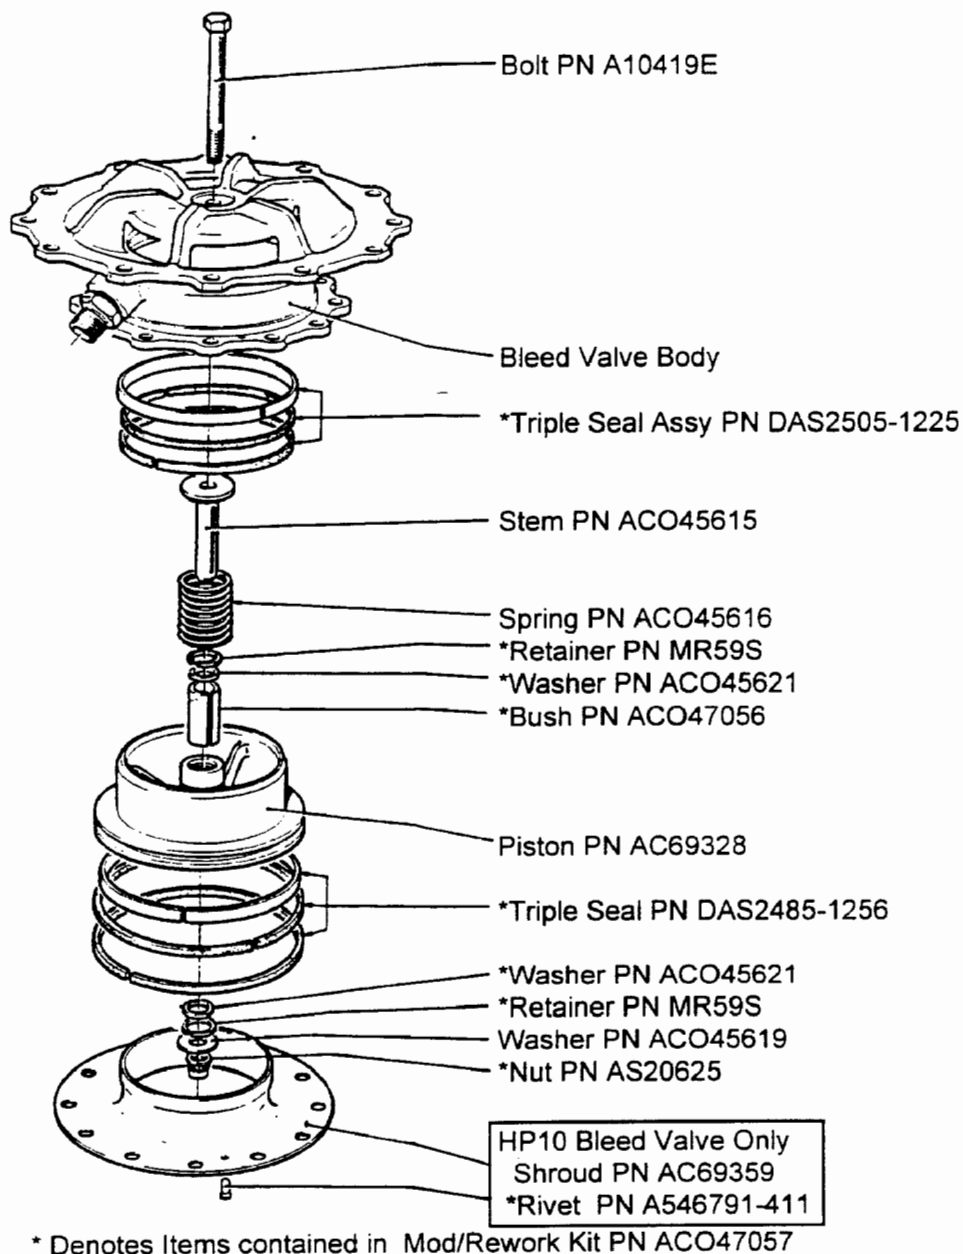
Exploded View of Bleed Valve showing Mod/Rework Kit Items
